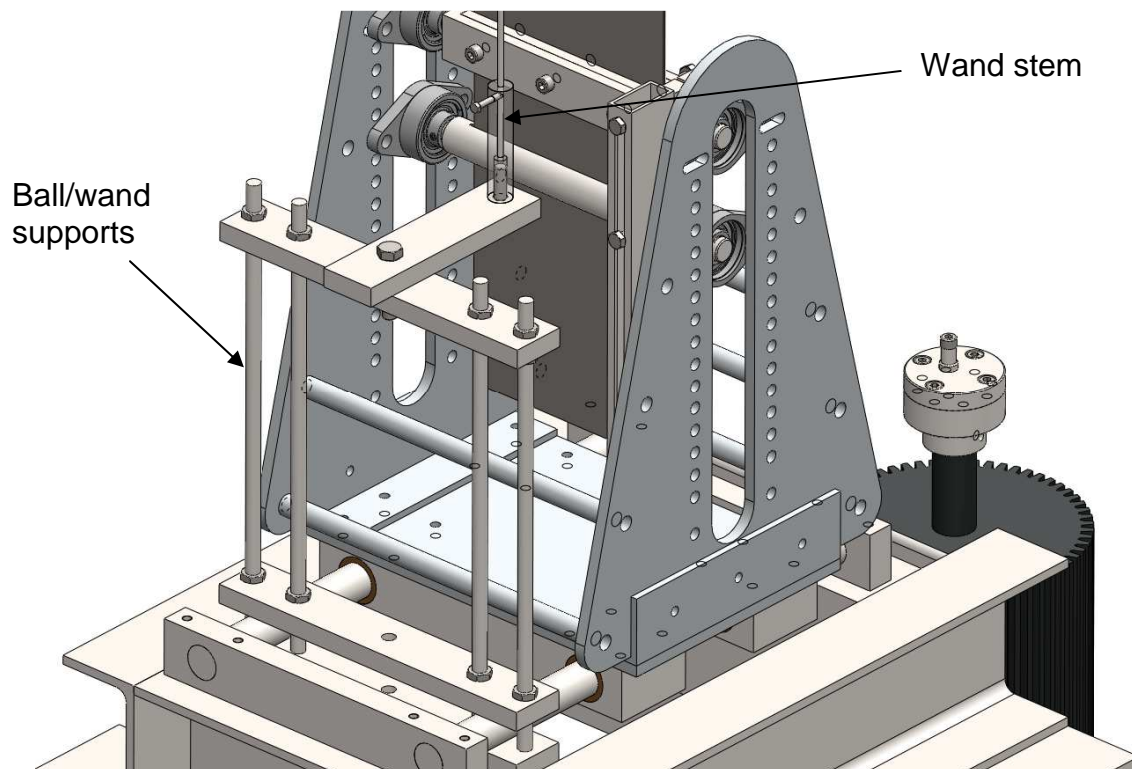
Ball and wand mounting arrangement on Blade test rig
